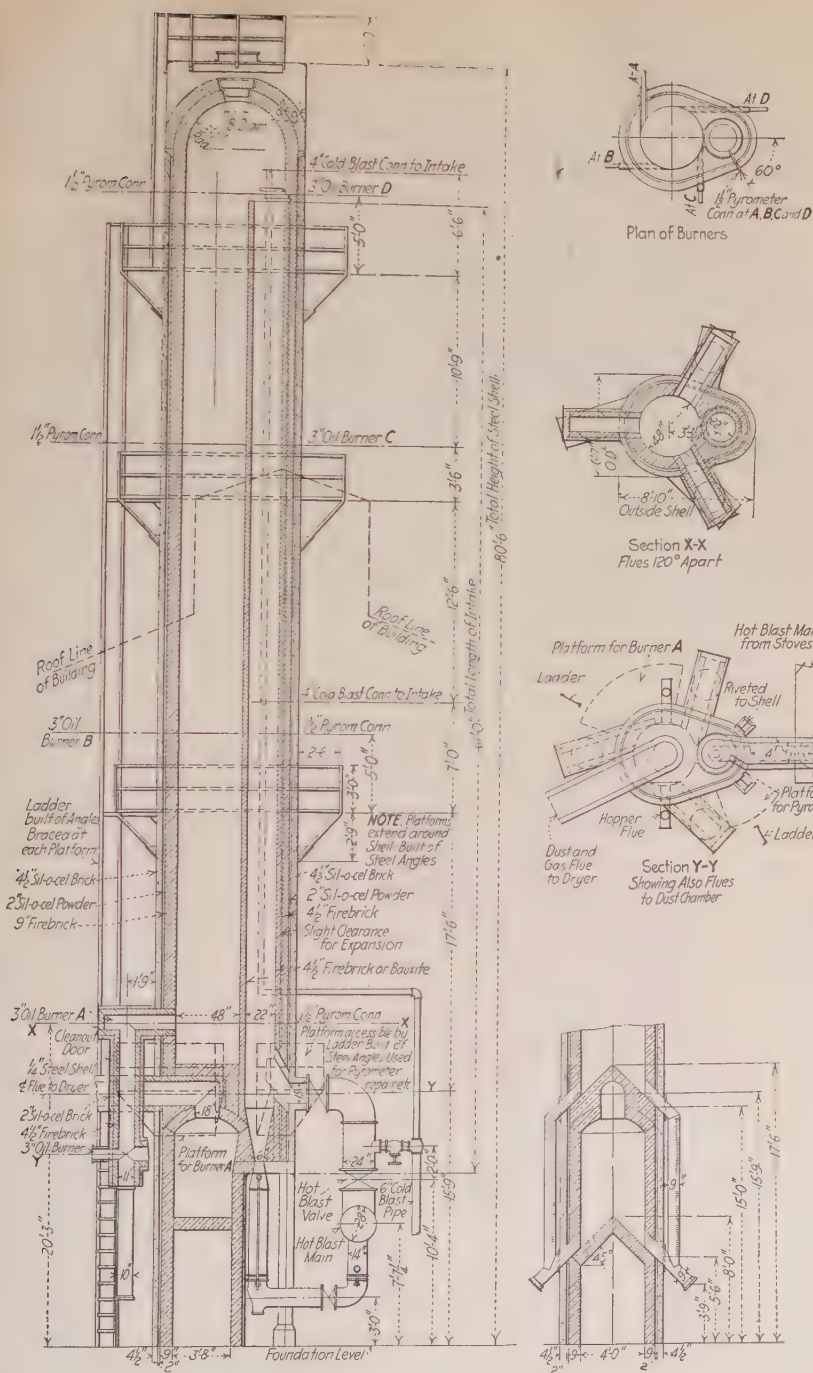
PROPOSED PLAN OF 12-TON FURNACE.
